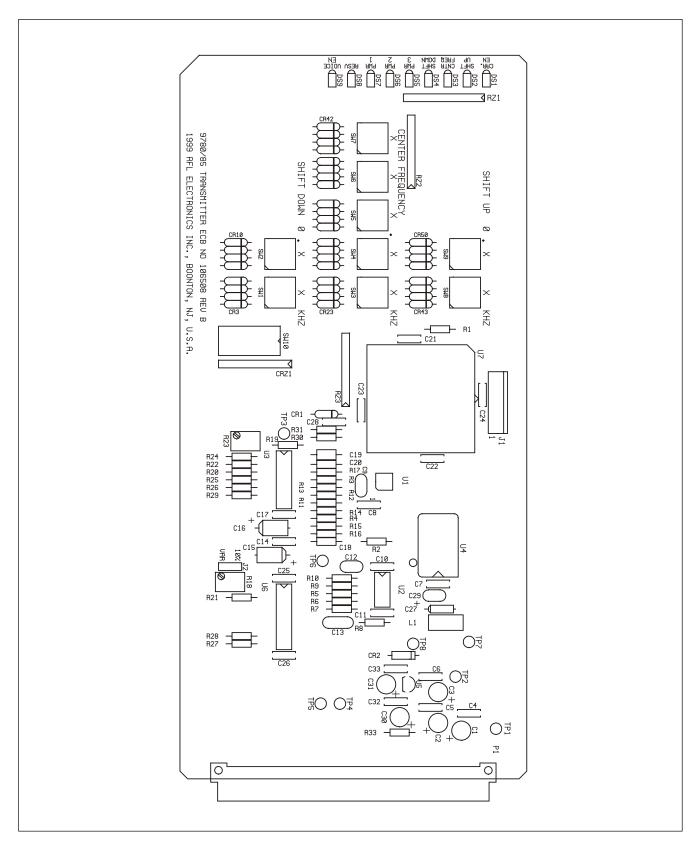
Component locator drawing, RFL 9780 Transmitter Module (Assembly No. 106505, Circuit Board No. D-106508, Rev. A)
